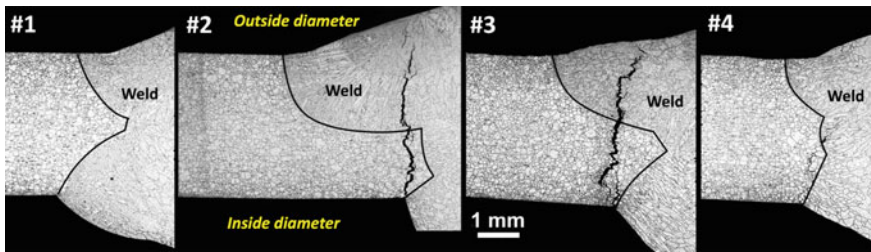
Cross-sectional etched micrographs for one side of a SRxC in an alloy 740H tube-to-tube weldment around the circumference showing crack initiation at the weld toe (#4), crack growth from weld toe through the HAZ and weld (#3 and #2), and no cracking (#1)
